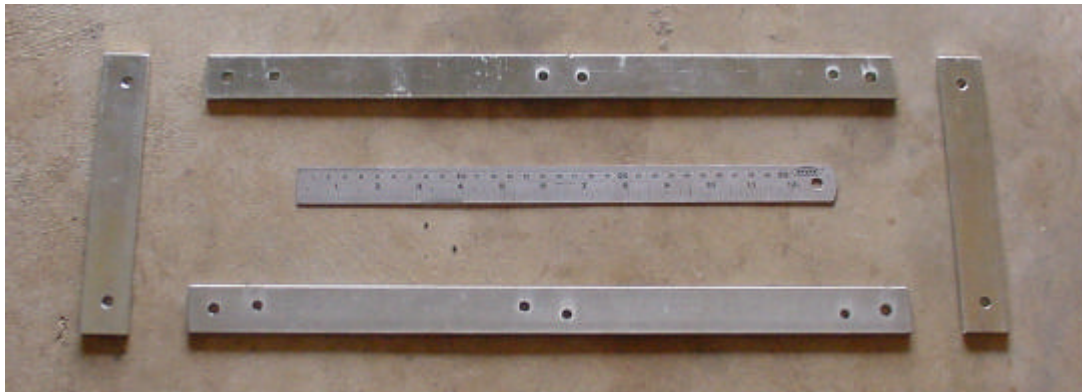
ATX power supply and charging unit mounting brackets and packers
